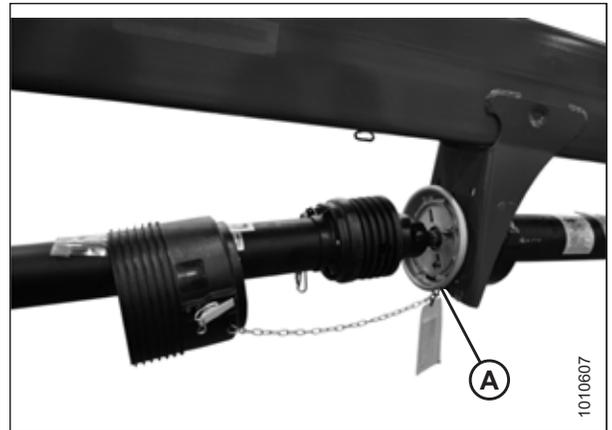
Driveline Shield Cone Removed from Metal Plate
